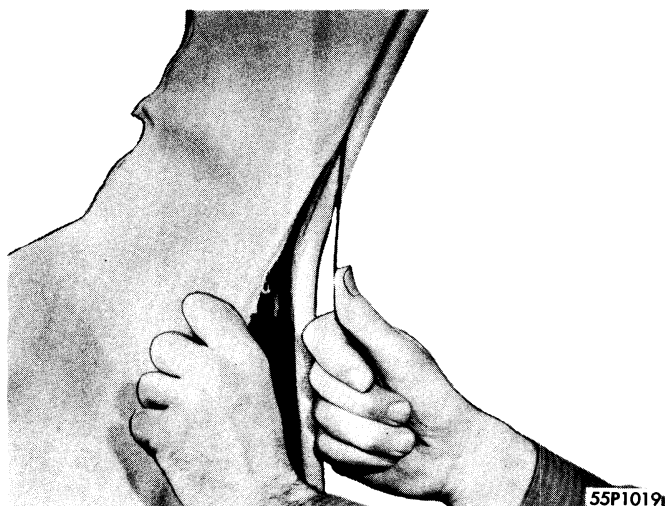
Using Stiff Wire to Remove Headlining From Retainer
